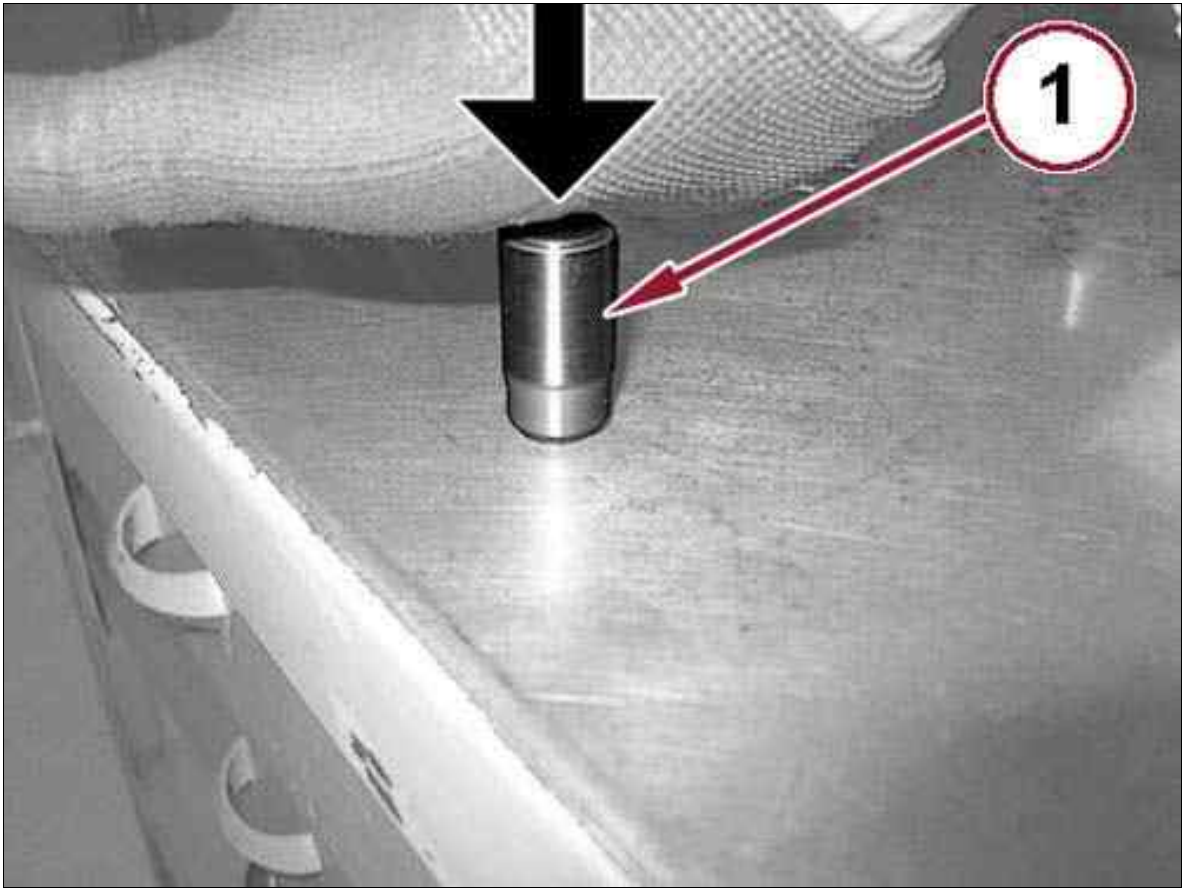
Moving Tensioner For Timing Drive Chain Cover
